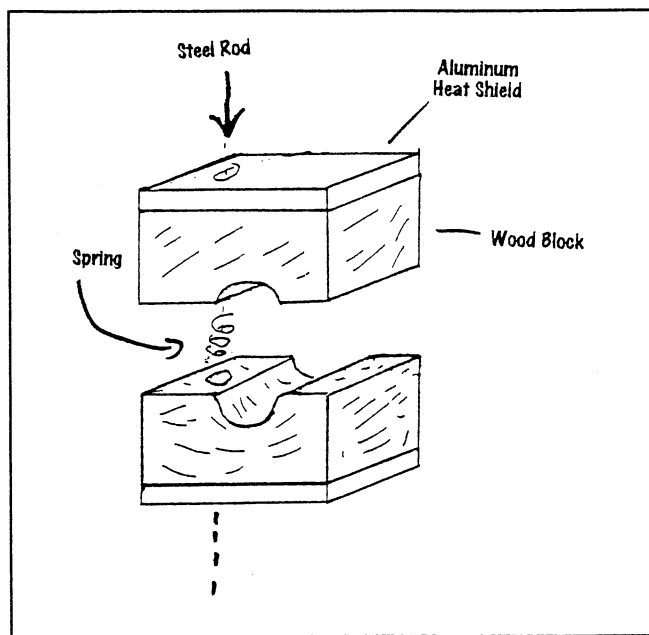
The wooden block clamp for holding cable section. The spring is removed from the jig/steel rod and nested in a well between the two blocks (wood side facing in). The steel rod is passed through the wood blocks and spring, then inserted in the cutout in the jig. The thumbscrew is used to apply pressure for closing and locking the wooden block clamp.
